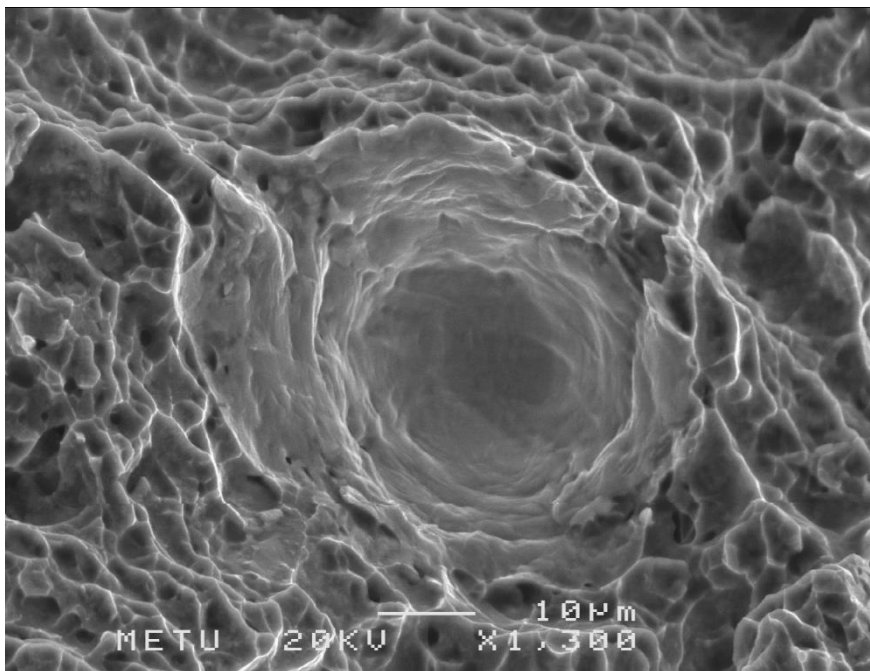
Void structure on the fracture surface for 30T specimen
